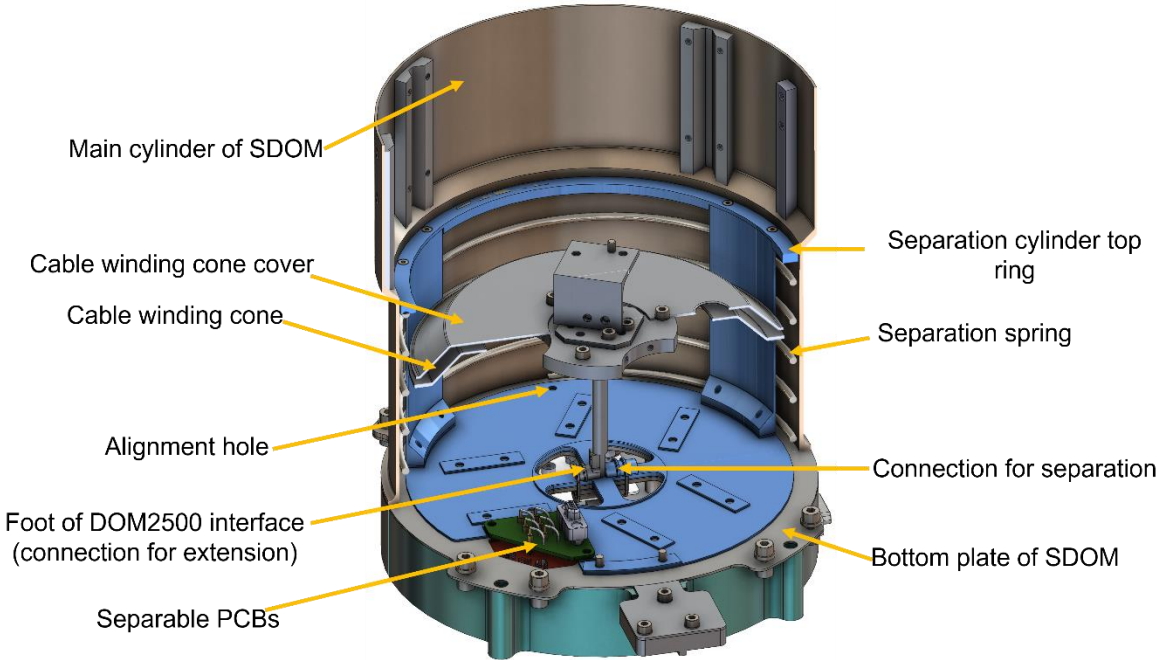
Partial sectioned view of SDOM assembly with several hidden components.
